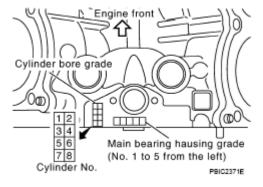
Identifying Main Bearing Housing Grade And Cylinder Bore Grade
